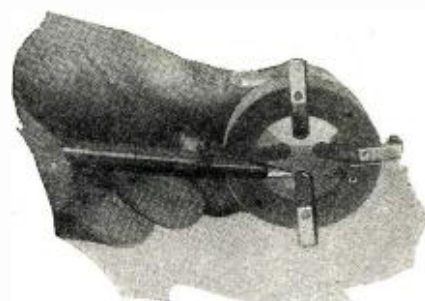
The pencil points to a bent contact spring on the vacuum tube socket.
